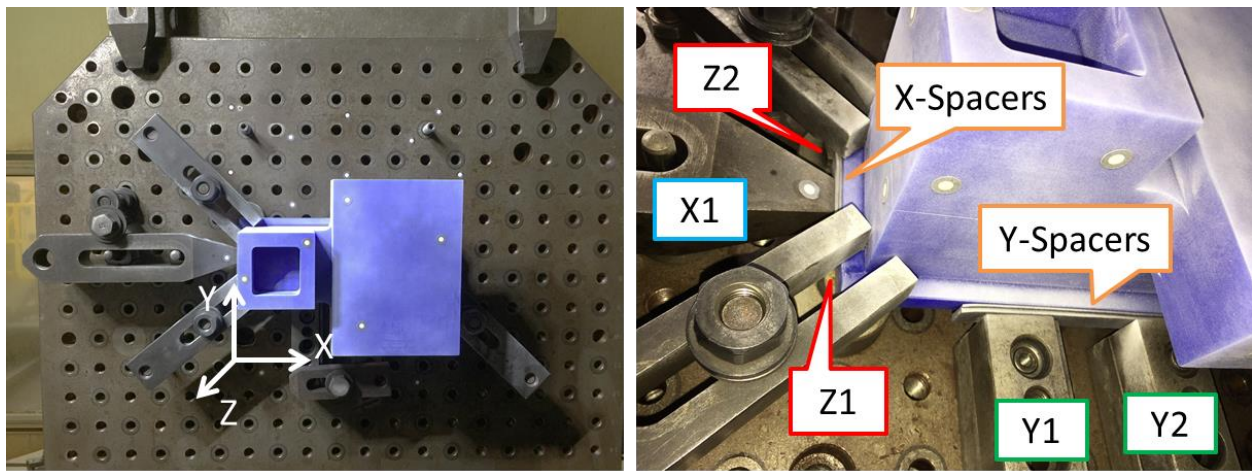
(a) The setup of the wax casting clamped on the machine table; (b) Spacers placed between locators and the casting.
